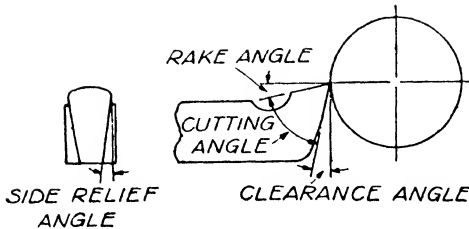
SINGLE POINT CUTTING TOOL ANGLES
